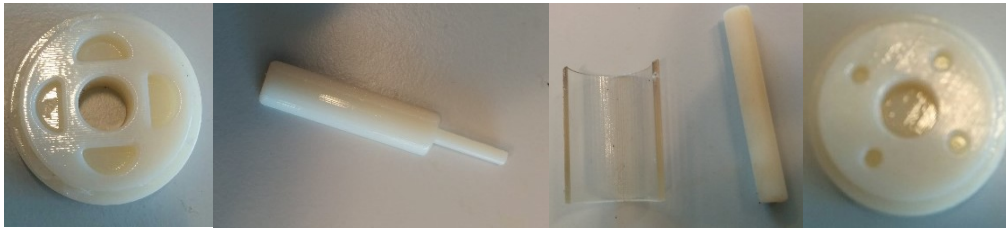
mold of MOLLUSC manipulator, from left to right: cap_A, chamber, shell and central cylinder, cap_B
